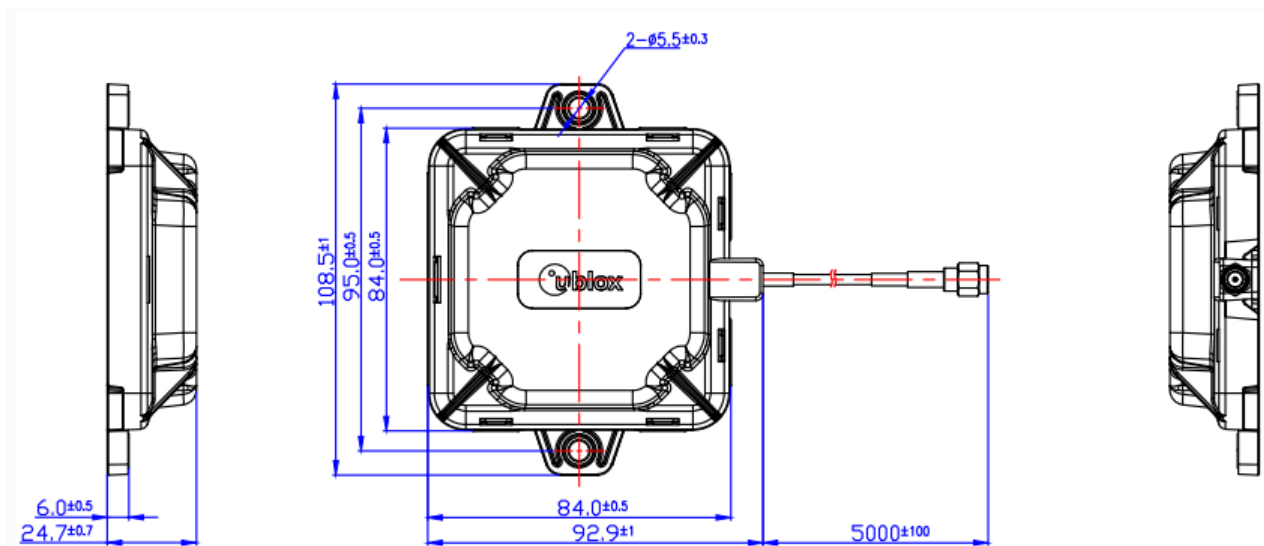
ANN-MB2 mechanical drawing. Dimensions are given in mm.
